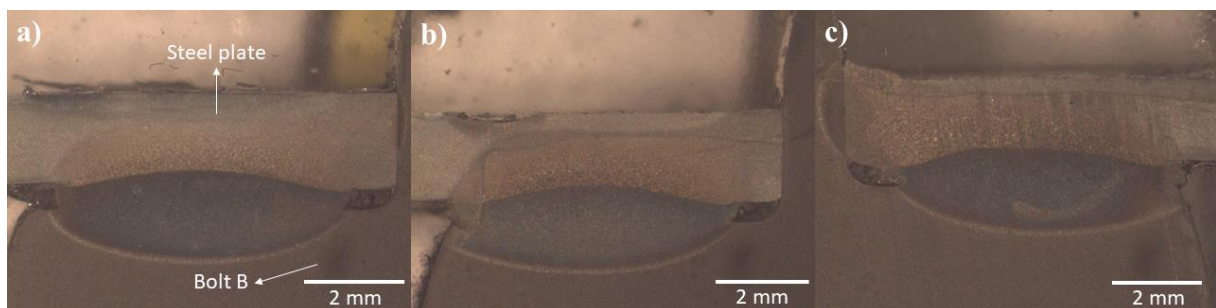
Electrode's Wear Study: Weld Nuggets Macrographs: a) 0 welds; b) 2500 welds; c) 5000 welds.
